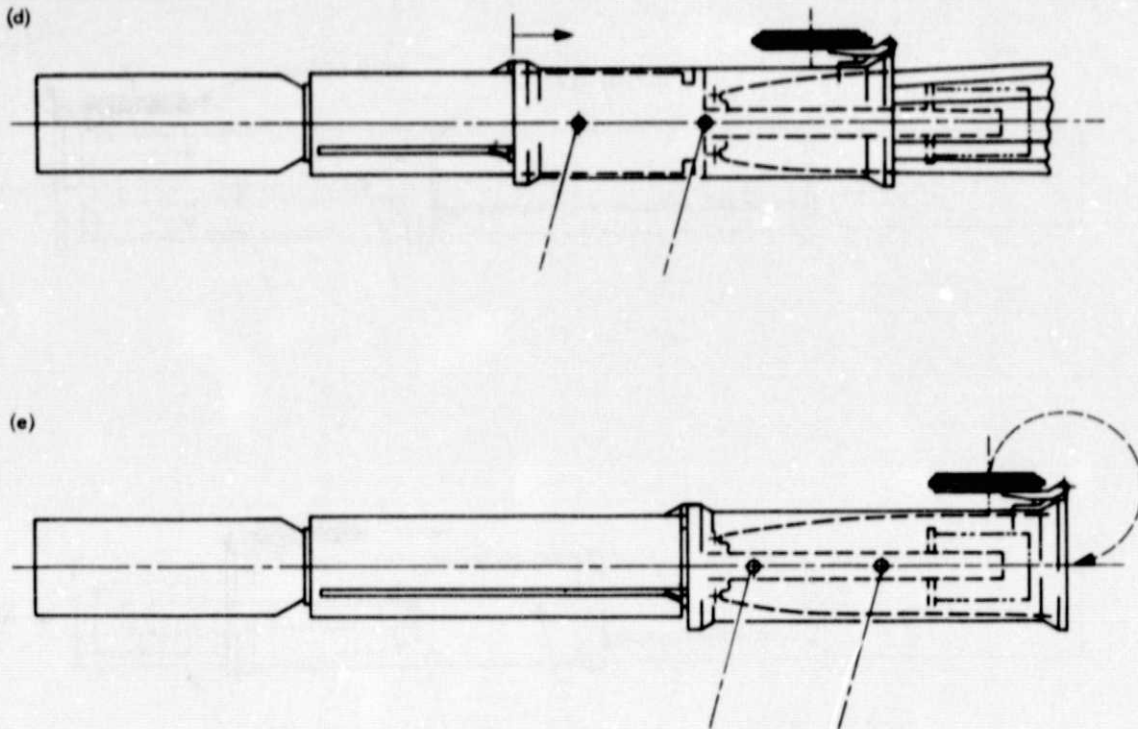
Deployment and retrieval sequence: (a) seals released, rear cover rotates; (b) pressure vessel is pulled forward over the electronics assembly; (c) shield fully deployed; (d) pressure vessel cylinder is pulled aft, shield refurls; (e) cover rotates into closed position, resealing drives are activated (continuation 1)
